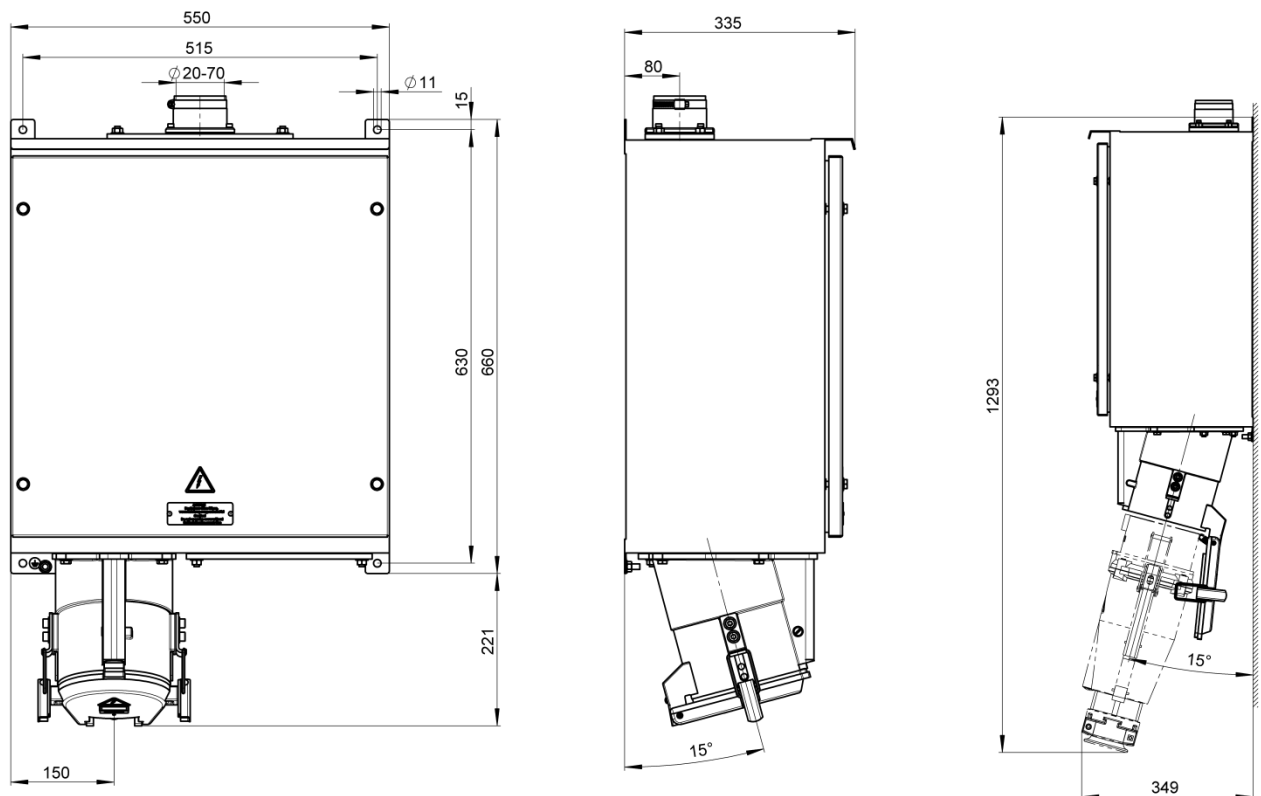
Dimensions, Connector Unit with Block Contactor CUBC B-Line (250 A – 400 A) in mm
